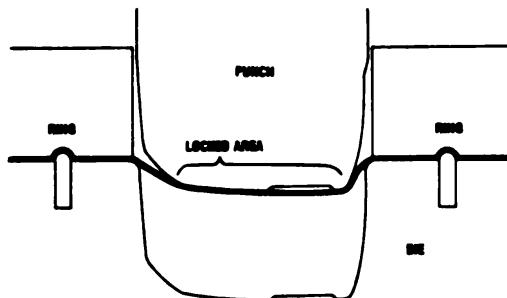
1979 Eldorado rear bumper typical punch and die section
